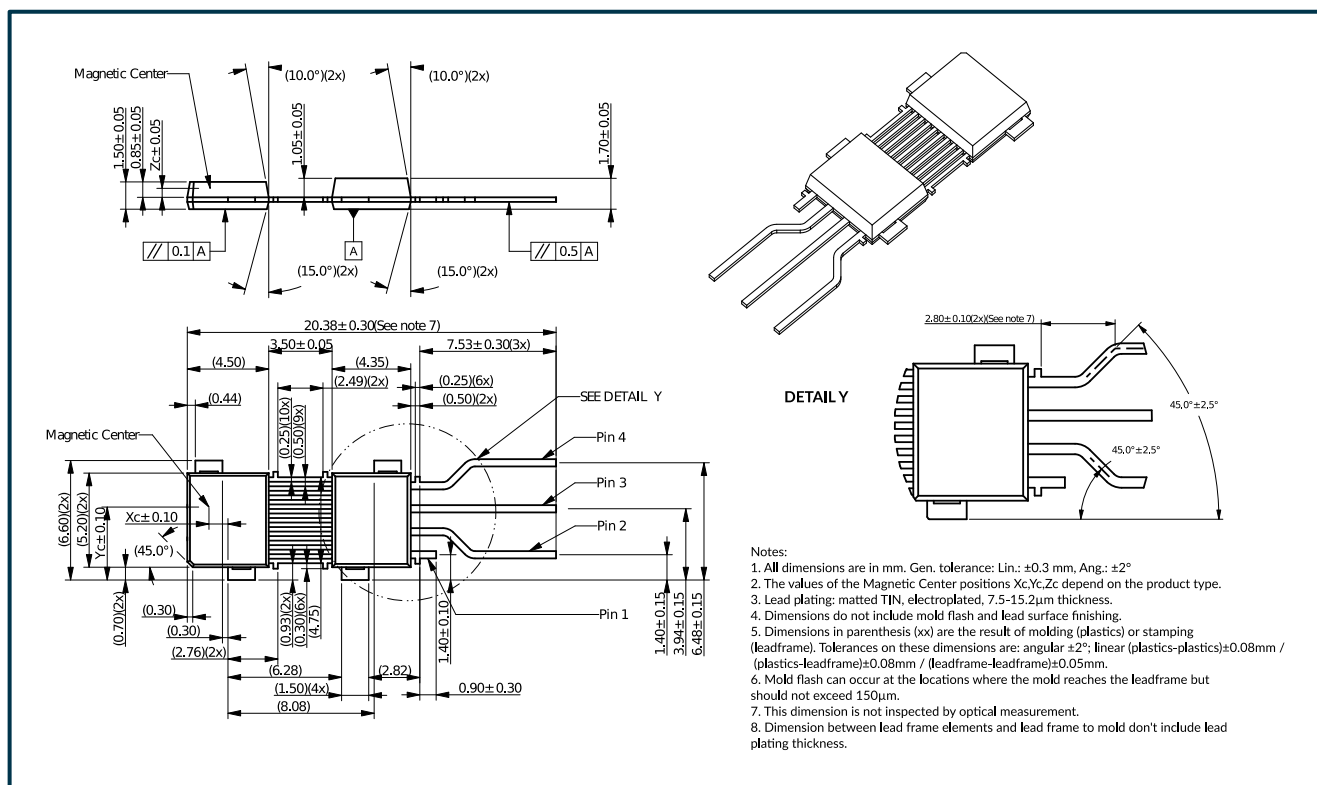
DMP-4 STD4 2.54 Package Outline Drawing
